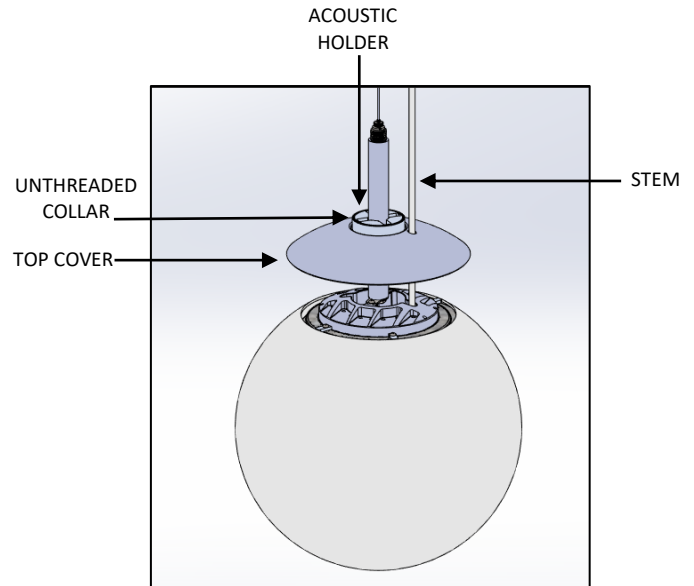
ACOUSTIC HOLDER INSTALLATION
